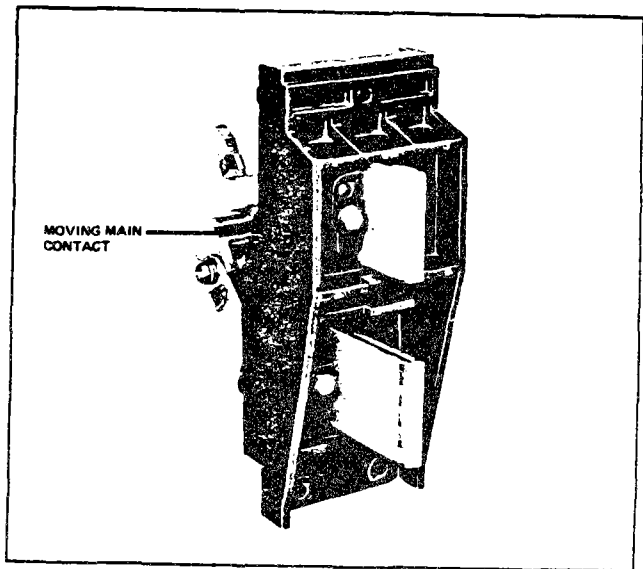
Type DS-420 Pole Unit Assembly - Rear View (391099)
